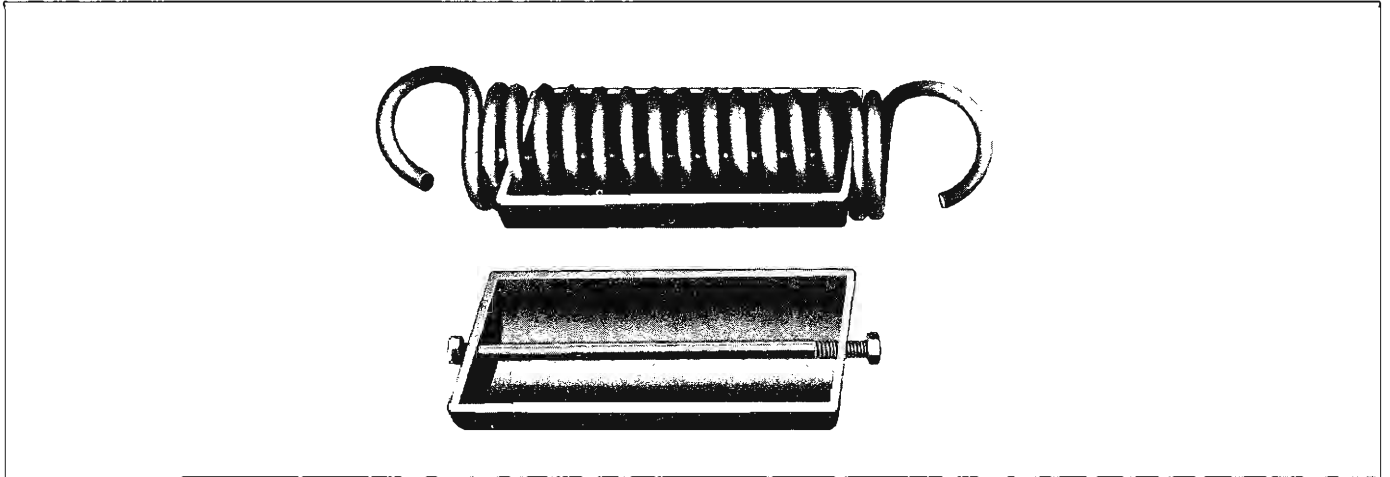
Special Tools - Chevrolet, Chevelle and Chevy II
